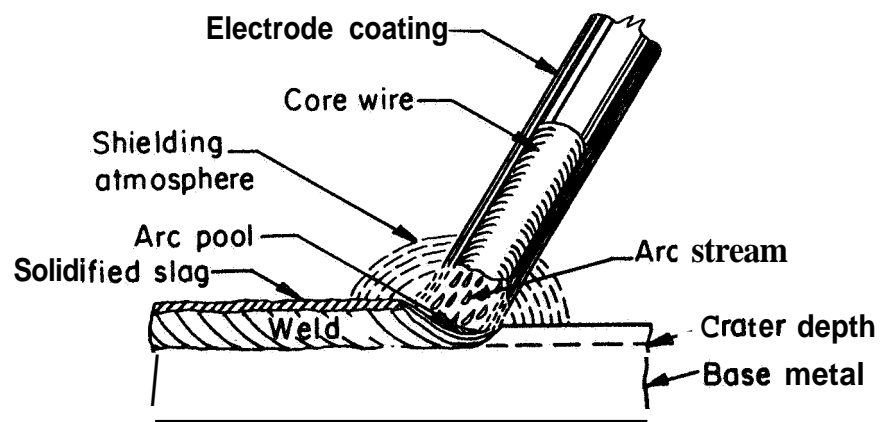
SKETCH OF SHIELD-METAL-ARC WELDING OPERATION (Ref. 29)
